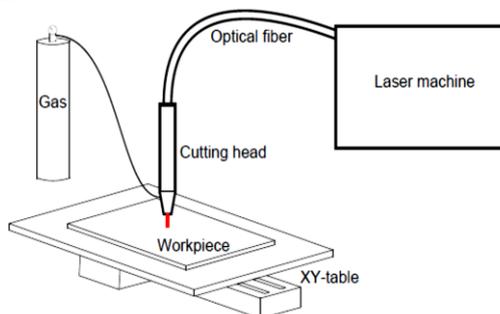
Example of a Laser Cutting Setup Consisting of a Laser Machine, Optical Fiber, Cutting Head, Gas, Work Piece and a XY-Table.
